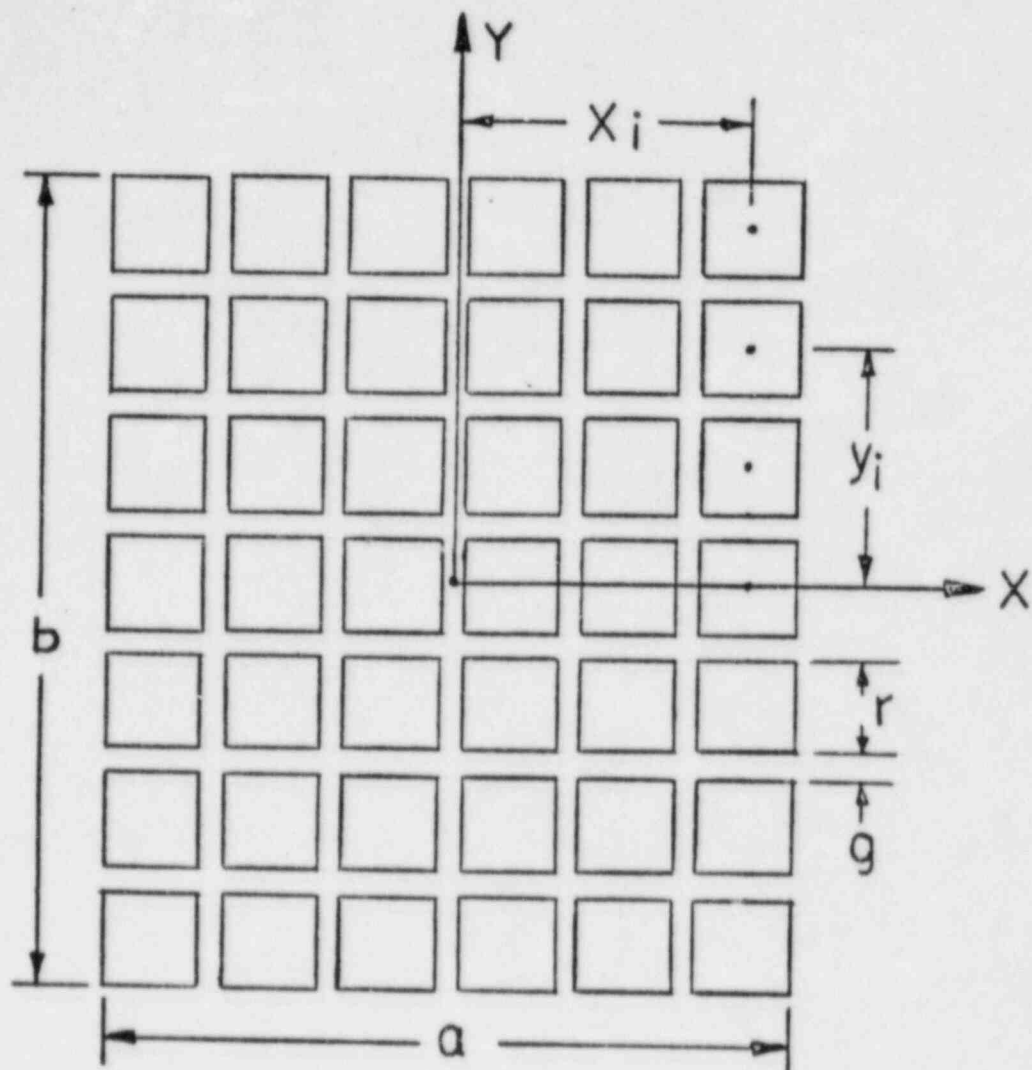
RACK CROSS SECTION AND TYPICAL CELL GEOMETRY, UNCONNECTED TUBE CONSTRUCTION
